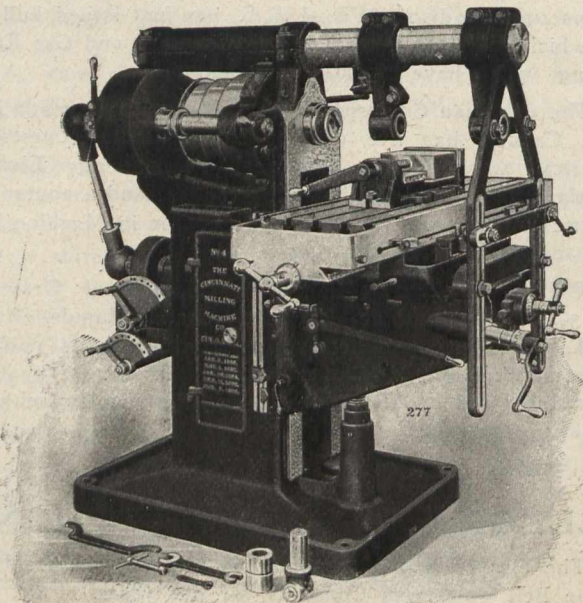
No. A. Plain Cincinnati Miller, with Double Back Gears and New Knee.
